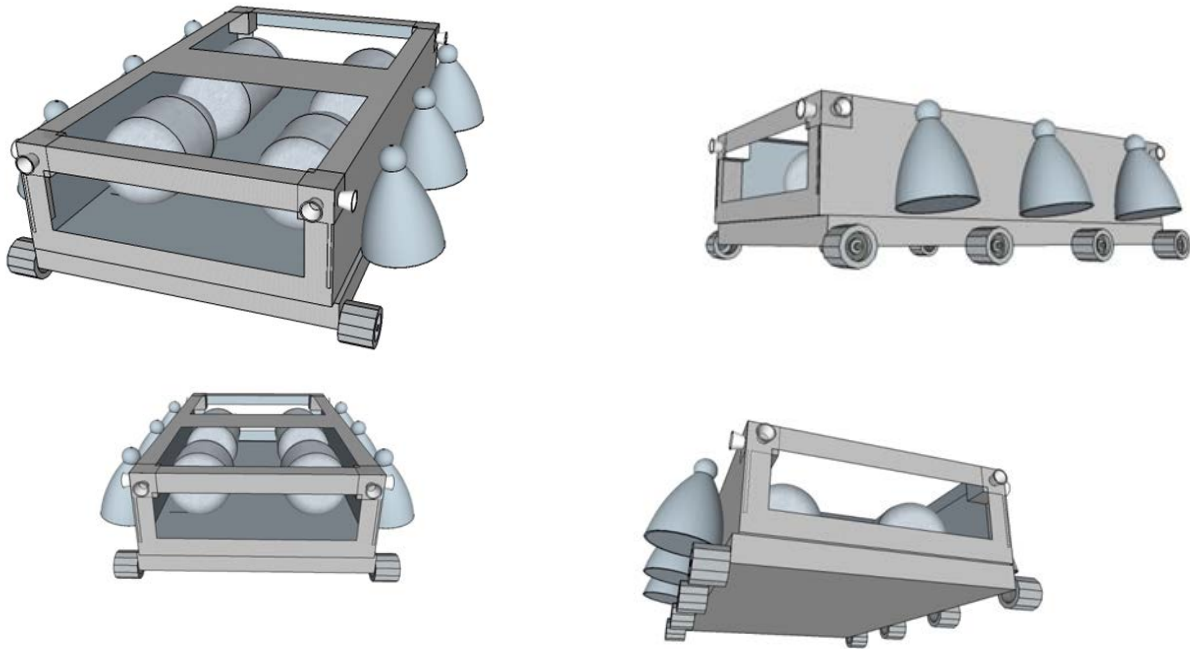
13. Multipurpose transport wheel - jet platform (schematic diagram)
